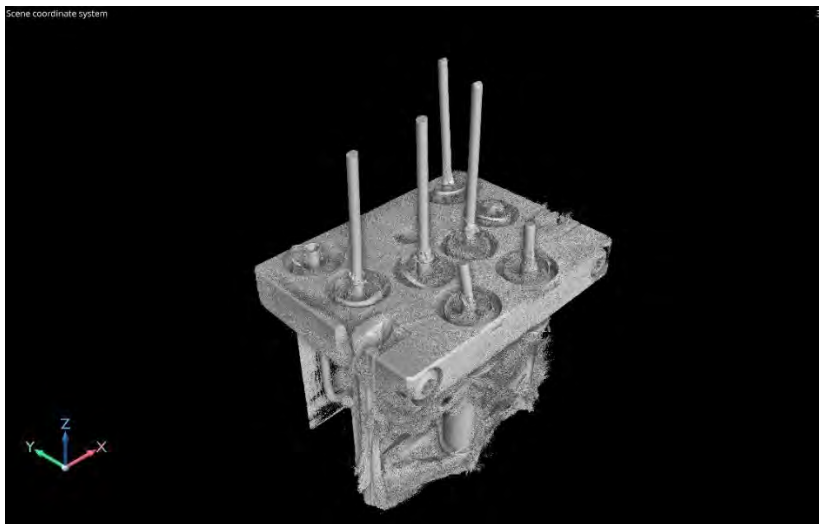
vibration testing inspections on the final prototypes of the Diagnostic Pressure Gauges sensor heads.
